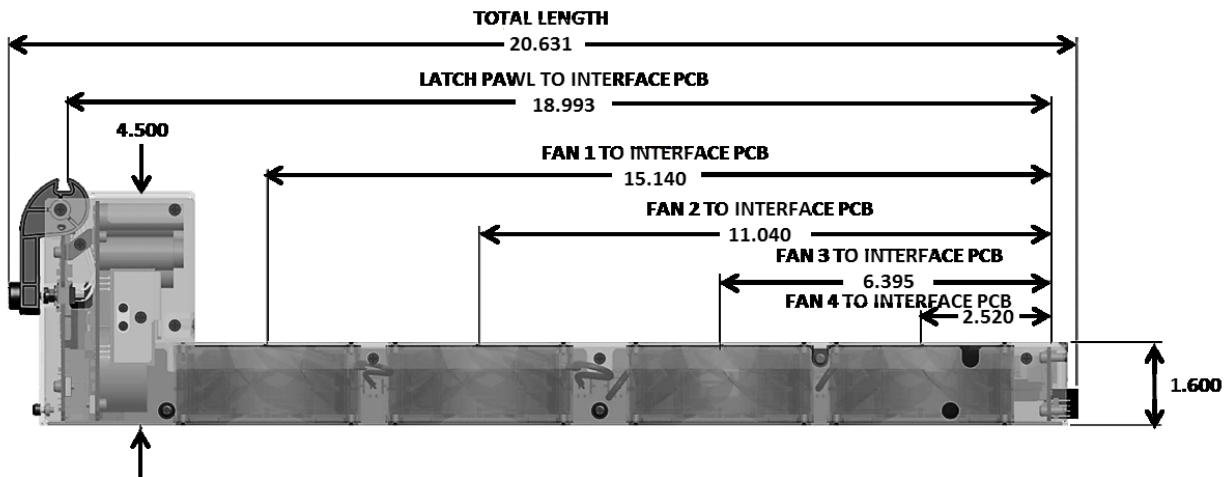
GEN2A Critical Dimensions (side) [inches]
